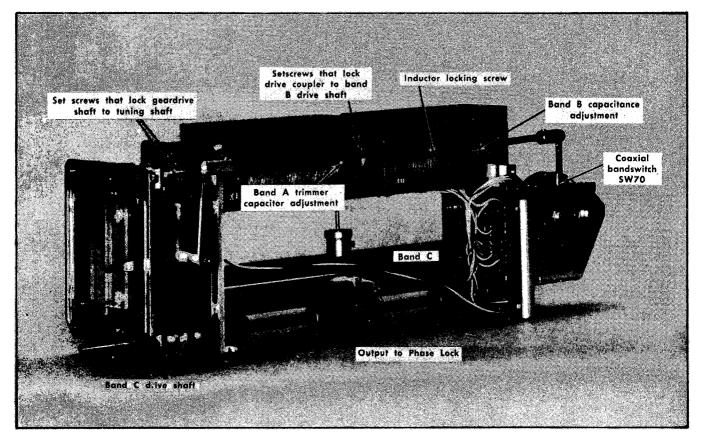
Local oscillator assembly showing drive shaft coupling and tuning adjustments.
